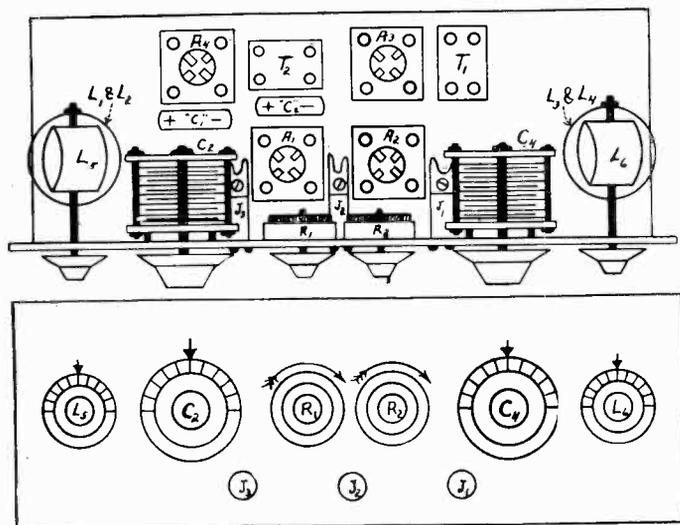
(lower diagram) shows the panel layout for the Double Superdyne. The baseboard layout is shown in the other drawing (Fig. 3).
